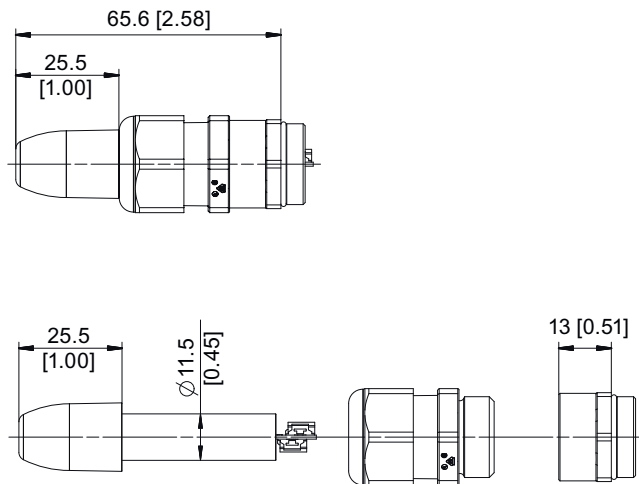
Dimension drawing SITRANS AW050 Bluetooth adapter, dimensions in mm (inch)
